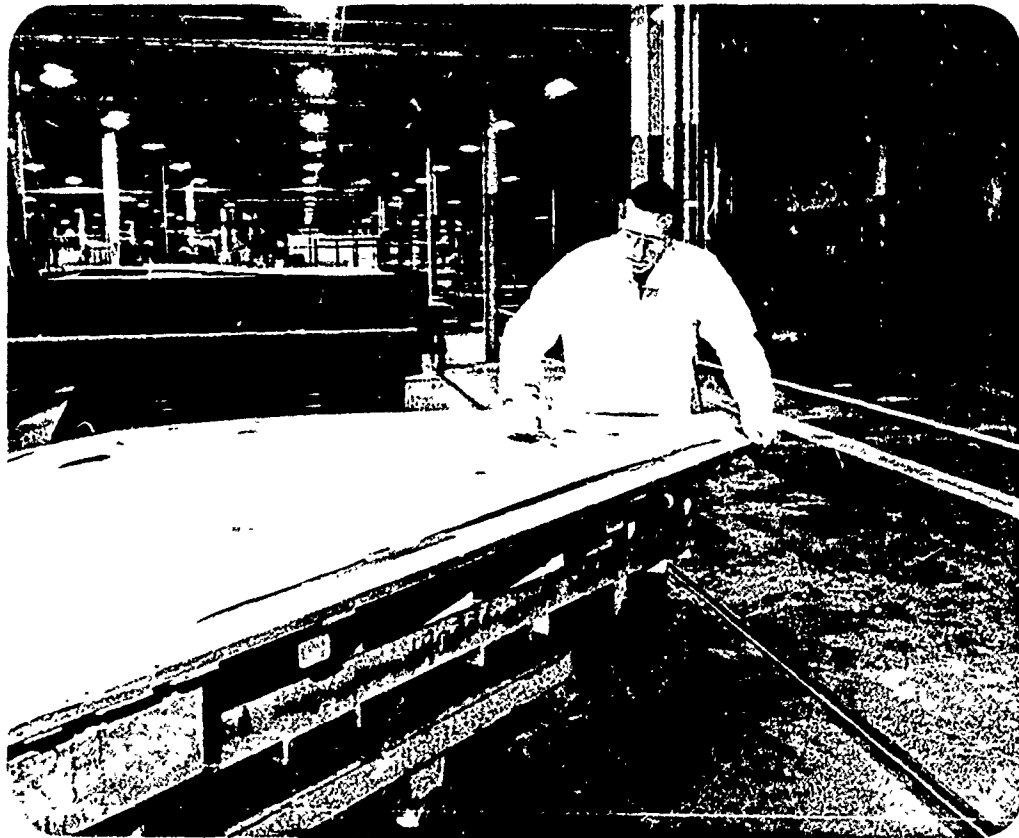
Composite part break-out - removing the caul sheet, and fiberglass "bleeder" cloth from a horizontal stabilizer skin.
